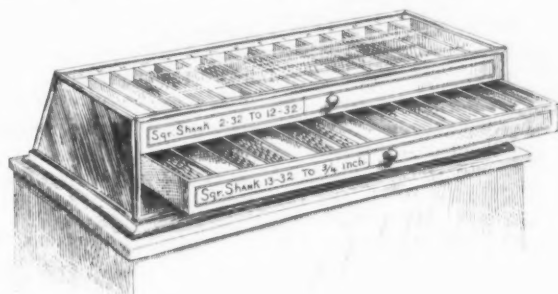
Arrangement of Drawers in Rear of Drill Case.
